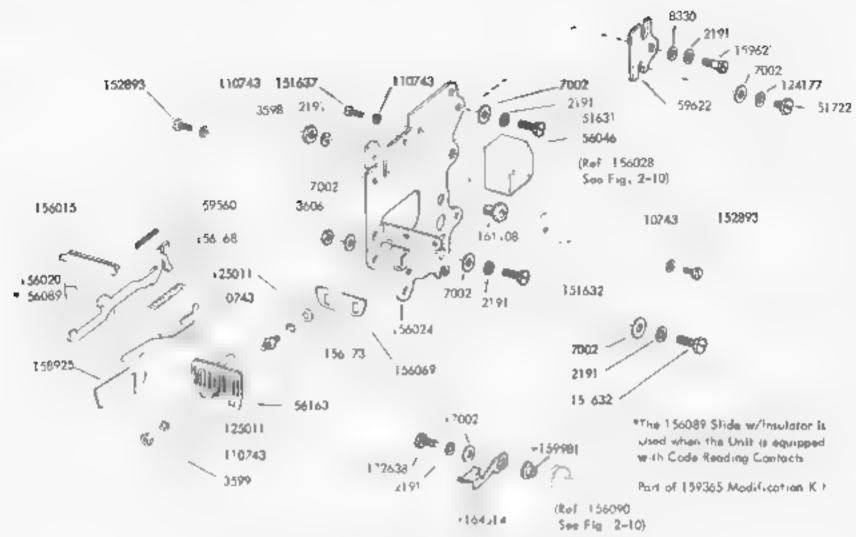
PUNCH REAR PLATE MECHANISM
